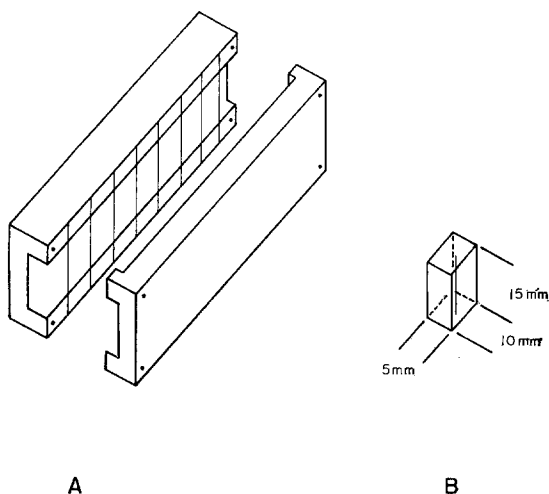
(a) Aluminium split mould. (b) Single fibre compression test specimen.
